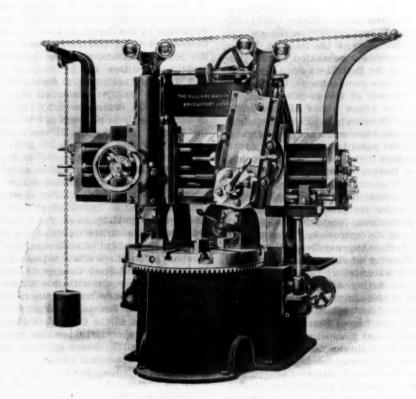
Bullard Double Turret Head Boring and Turning Mill.
